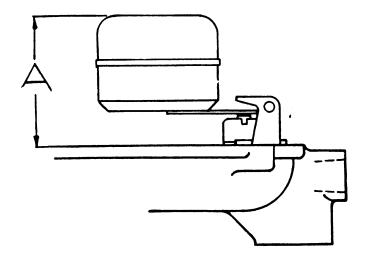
Diagram Showing Measurement of Carburetor Float Level. Measurement A Should be 1½ Inch Plus or Minus ¾ Inch
